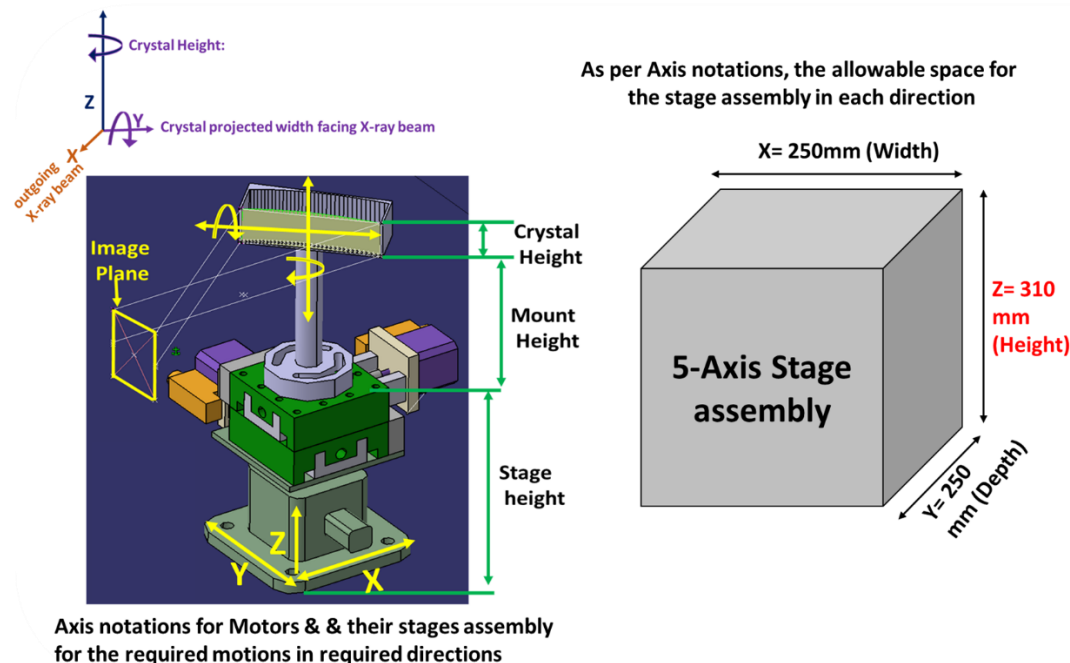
Axis notation for stage assembly in concept model & allowed space details for complete stage assembly. This is only representative CAD model.
